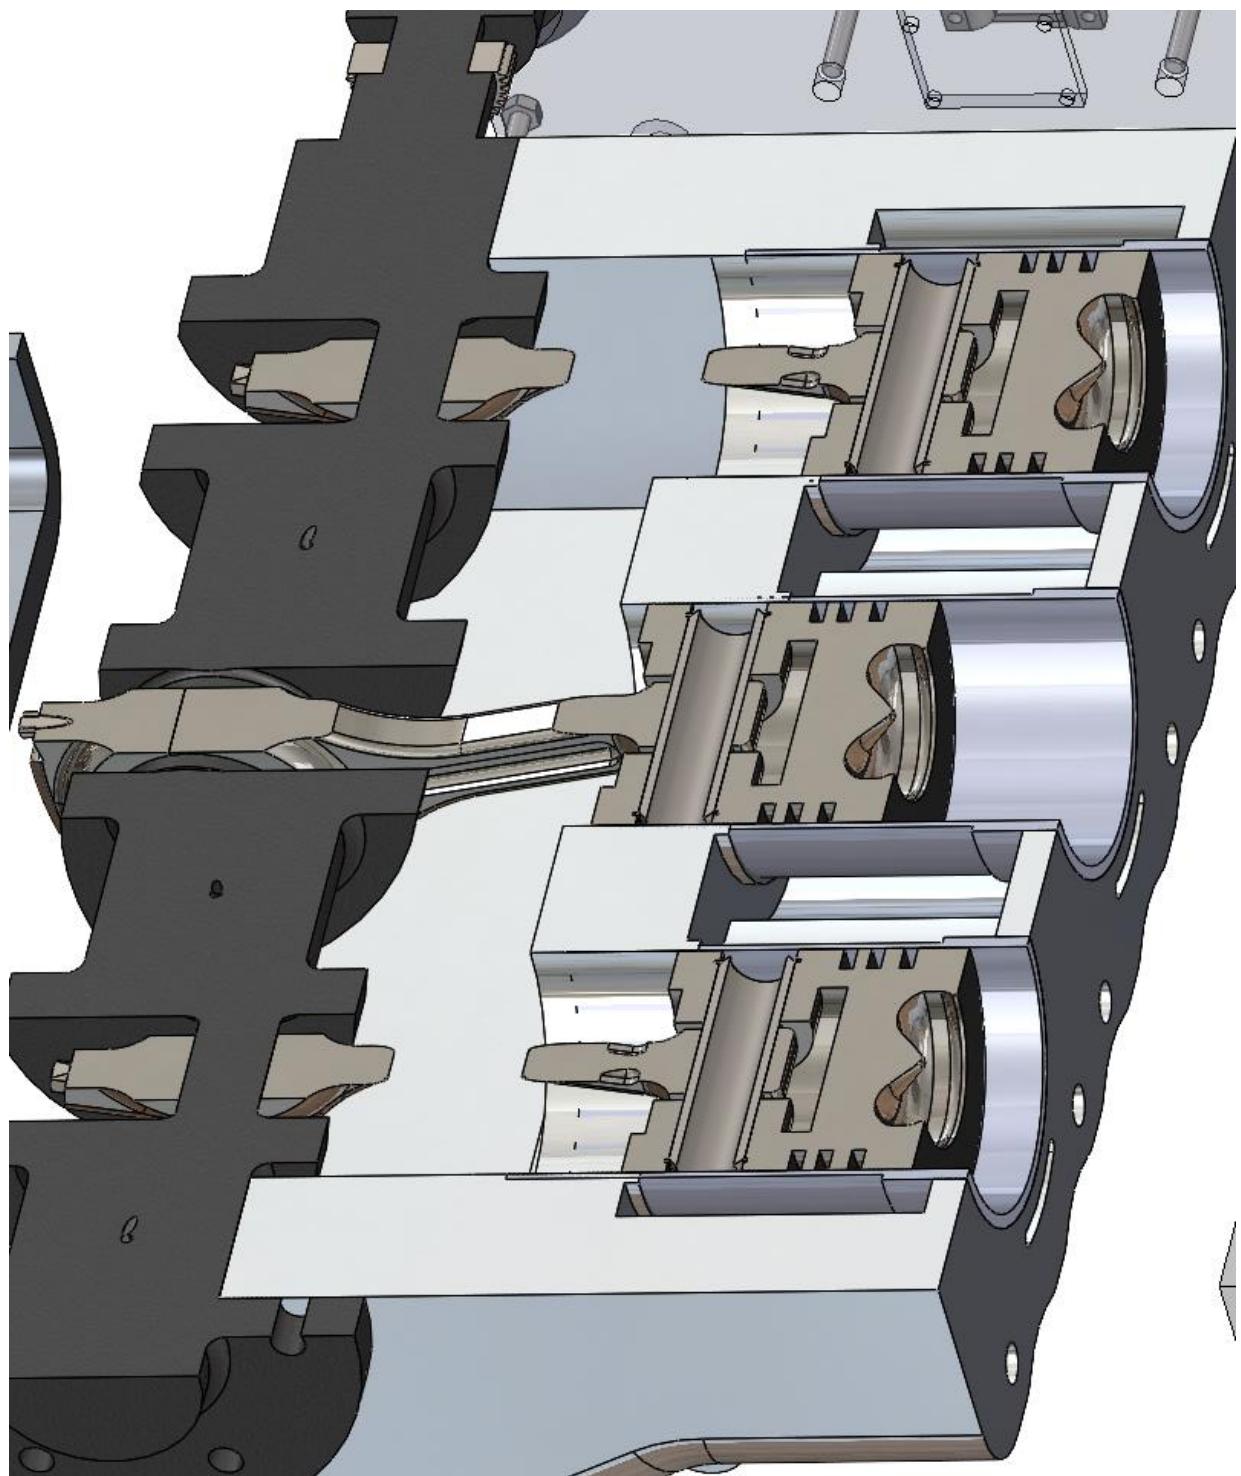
Section View of Detailed Exploded View of The Engine CAD Assembly.
